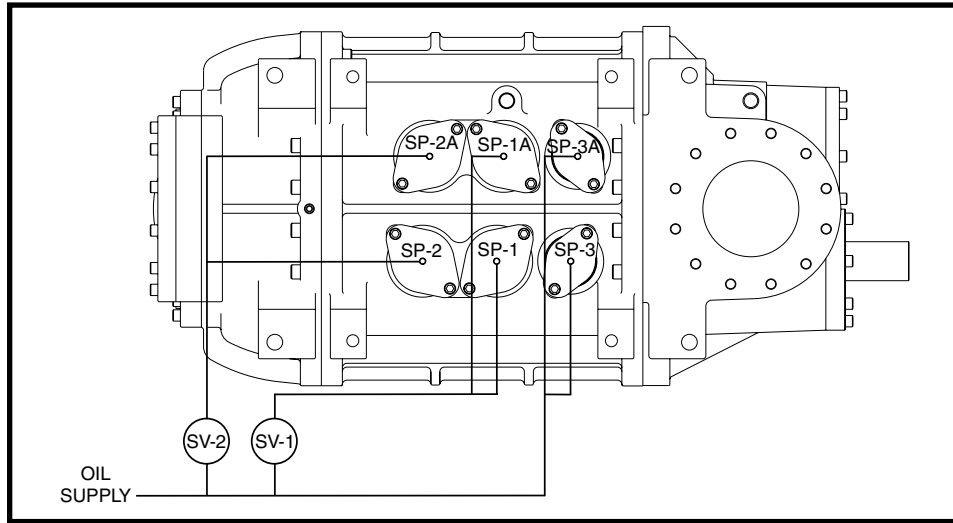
TDSL 283XL 3-Step P & I Diagram with 4-Step Machine (bottom view)
